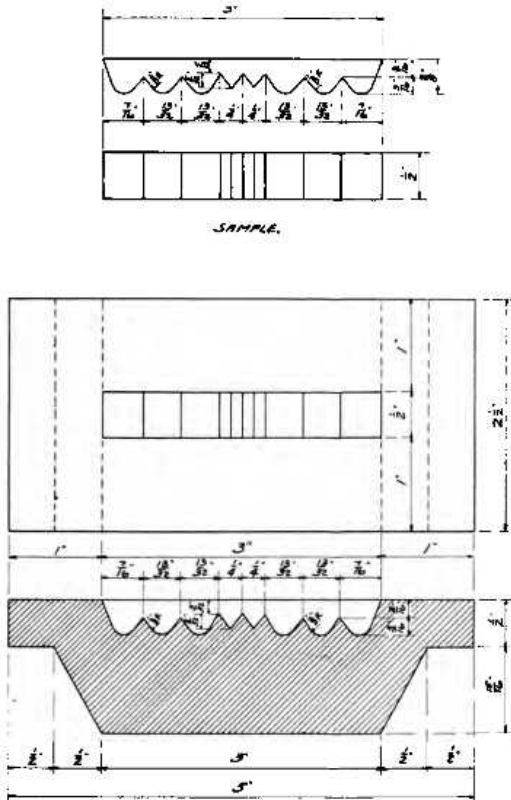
TEST PIECE AND MOULD FOR SAMPLING MOLTEN PIG IRON FOR CHEMICAL ANALYSIS.
